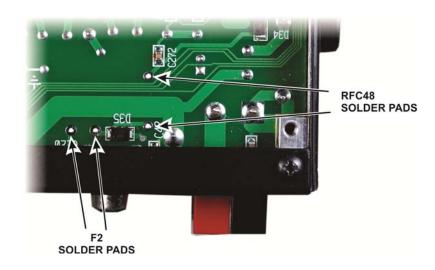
RFC48 and Fuse F2 Solder Pads on the Bottom of the Board.
